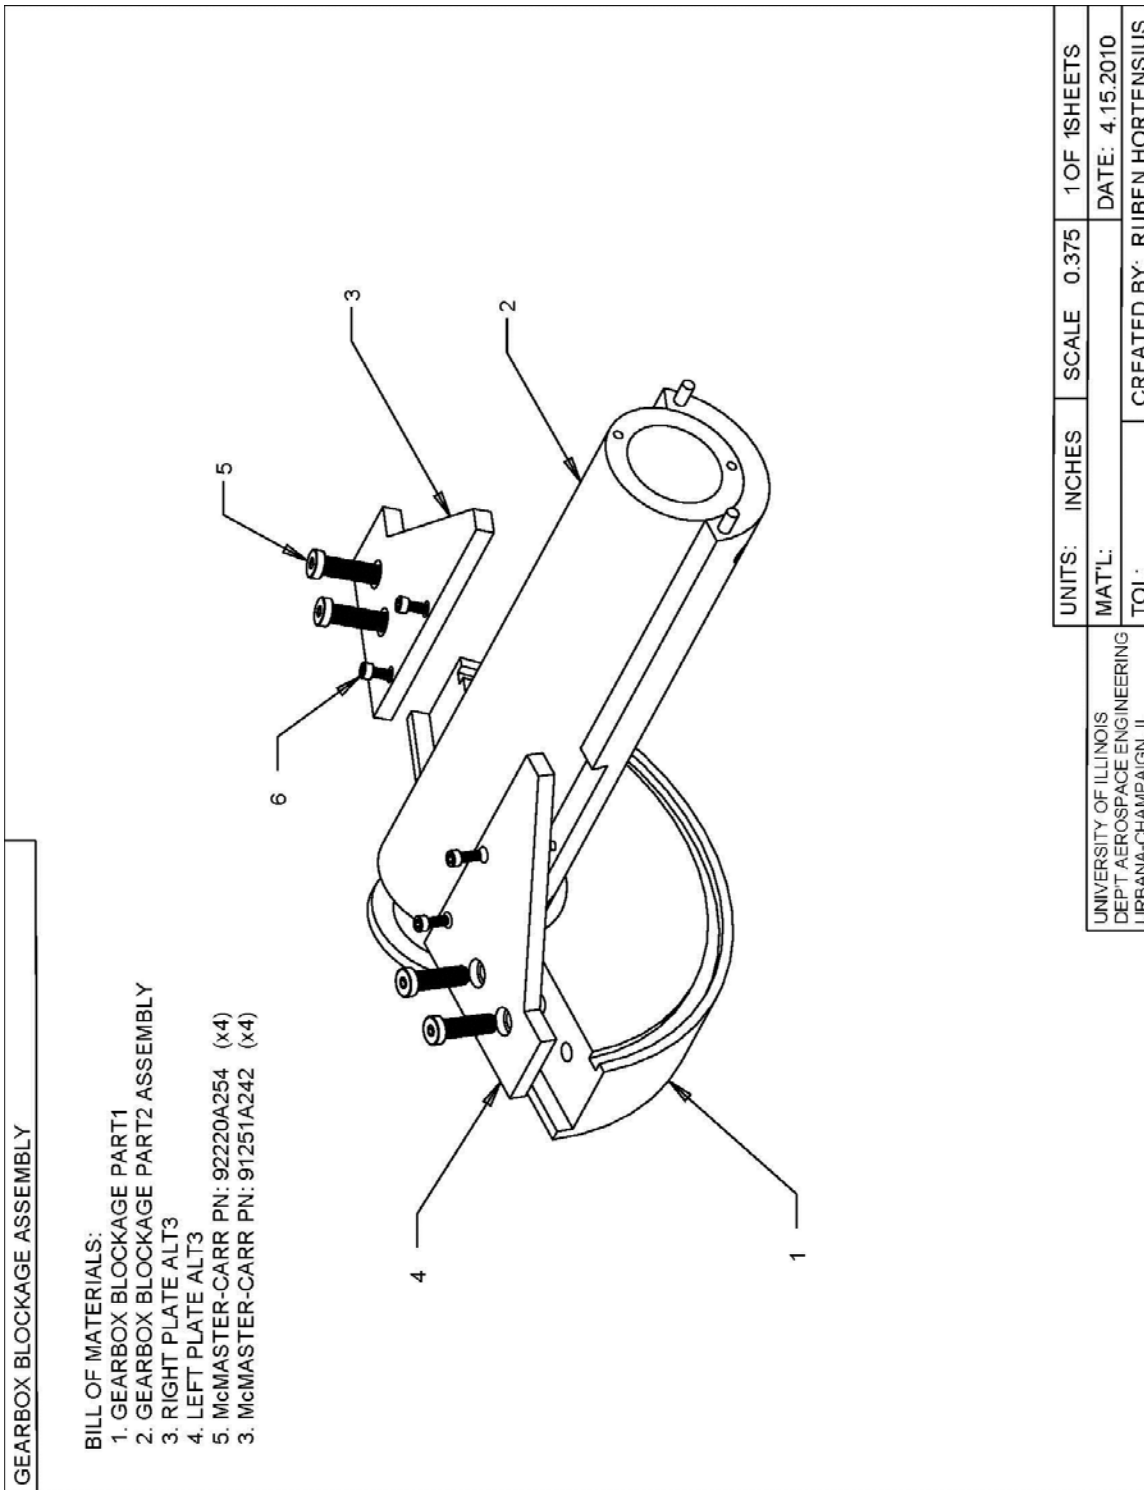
Gearbox Blockage Subassembly Drawing.
